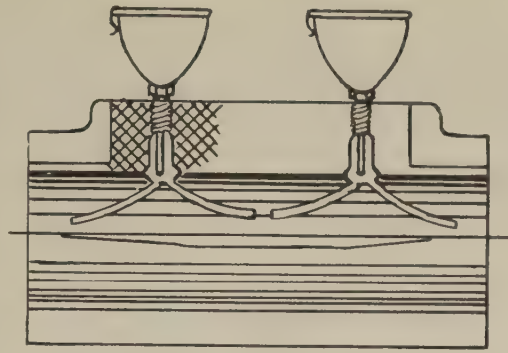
A plain bearing having original grease pocket filled with babbitt metal and fitted with cups or bottle oilers. Babbitt is represented by cross hatch lines
